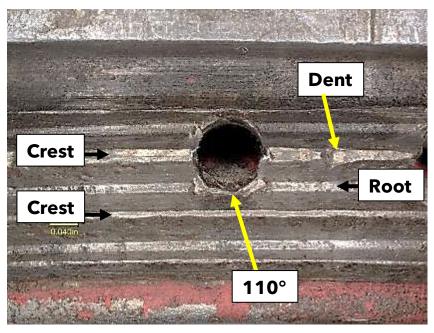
Side view of the clamp nut showing a radial-oriented drilled through-hole in the outer threads, at approximately 110 degrees; after cleaning the threads with a cotton swab soaked with acetone. Metal enclosure for the moisture seal assembly is located under the drilled holes.
